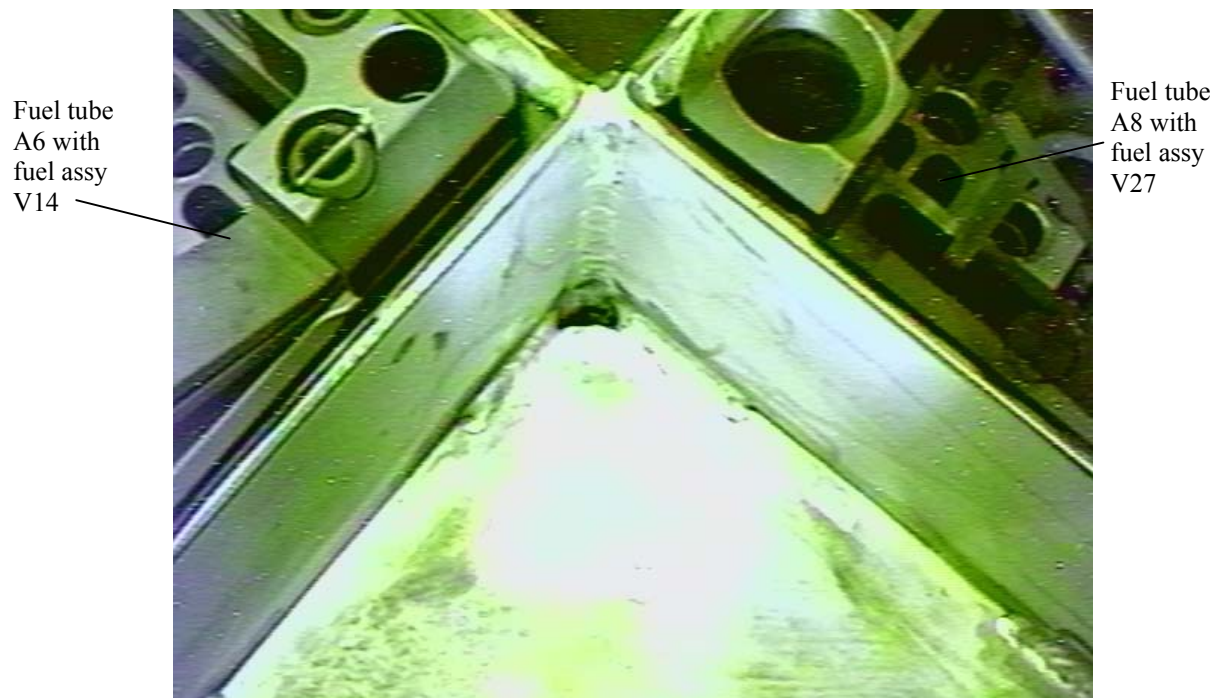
Tube reinforcement plate and associated welds between A-5, A-6, and A-8.
